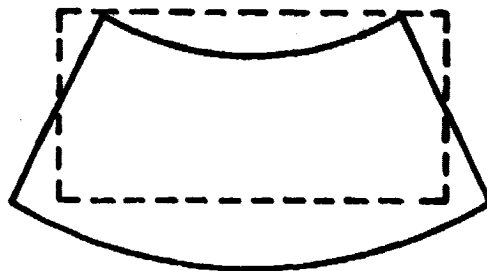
GEAR TOOTH LOWER PORTION - BLANK
